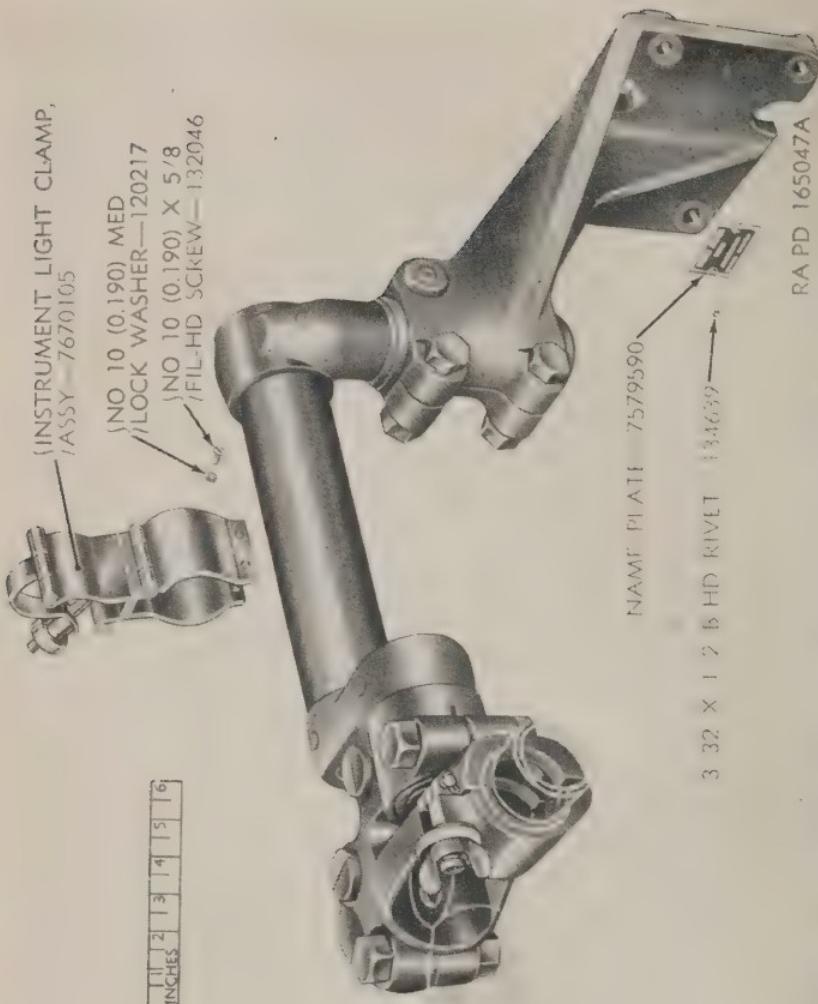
Telescope mount M54—removal of the instrument light clamp assembly and nameplate.
